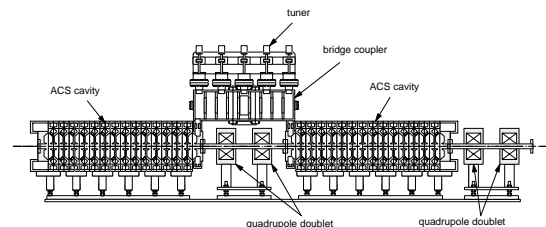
Layout of a revised ACS module. Although the bridge coupler is shown above the beam line in this figure, we plan to place it below.
